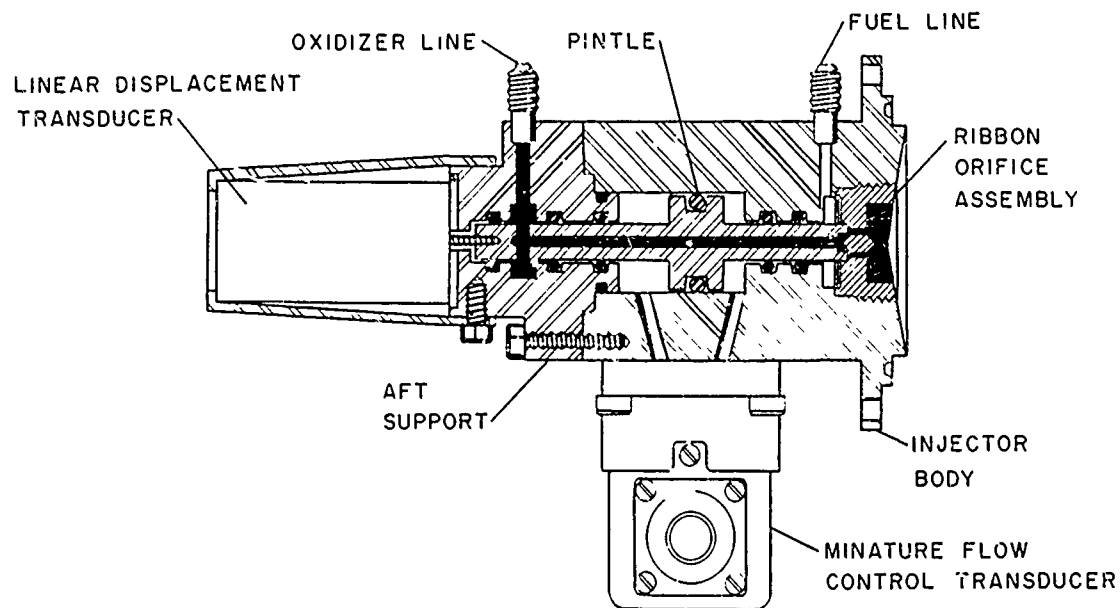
0-35-Pound Gas Generator Variable-Area-Injector Assembly.
